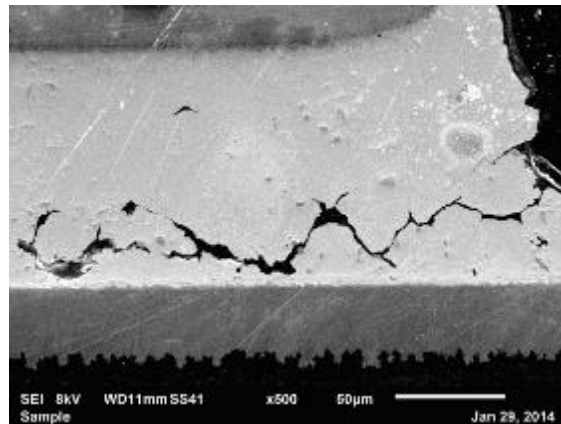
Cracking along Sn grain boundaries in QFN88 solder joint assembled using Material D
